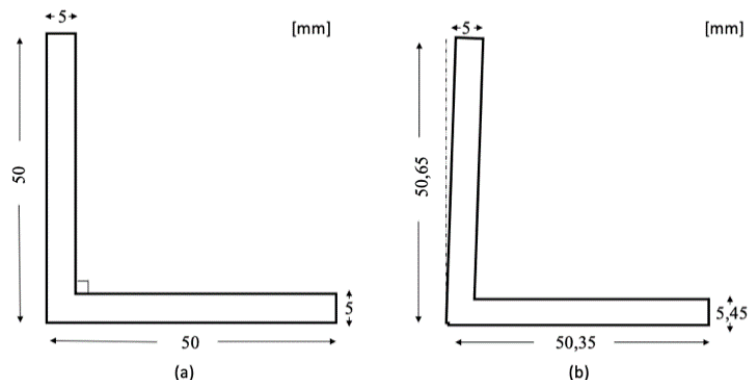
Dimension of Dimensional specimen. (a) reference dimensions. (b) actual dimensions.
